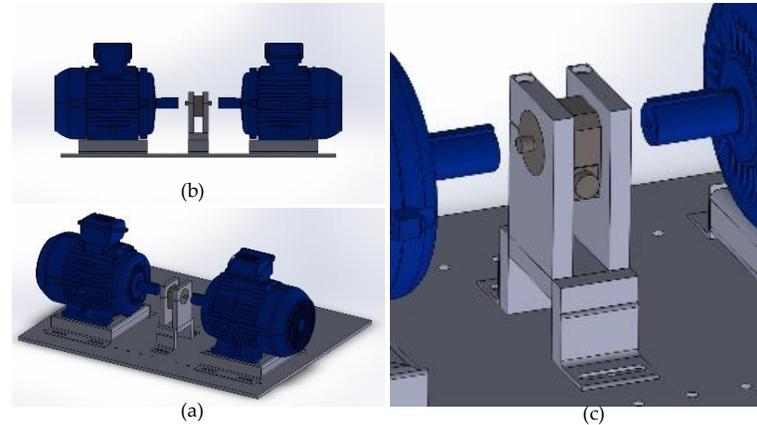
Schemes for tests of Rotatory Electric Machines – (a) Perspective view – (b) Front view – (c) Load cell detail
